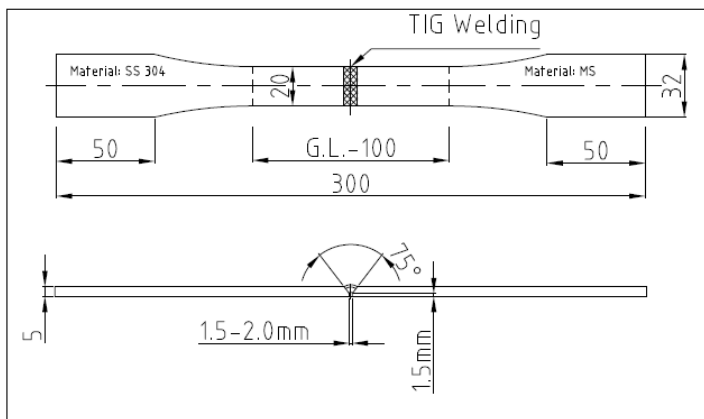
Tensile Test Specimen as per QW 462.1 (a)
